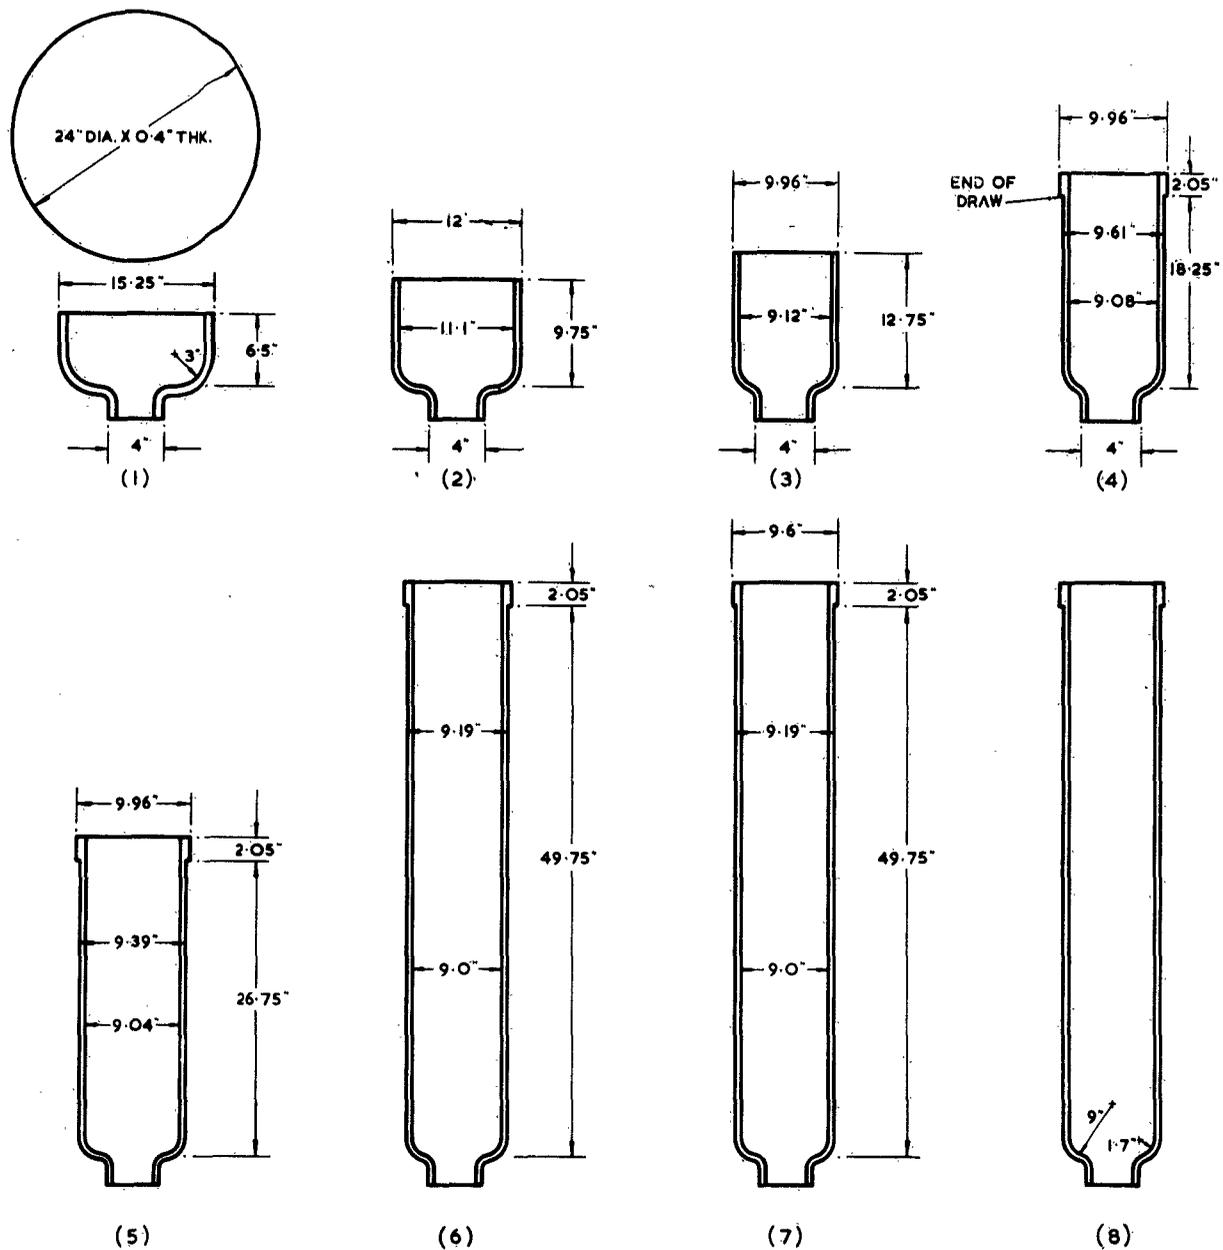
Stages in the manufacture of Buzzard motor tubes by deep drawing
